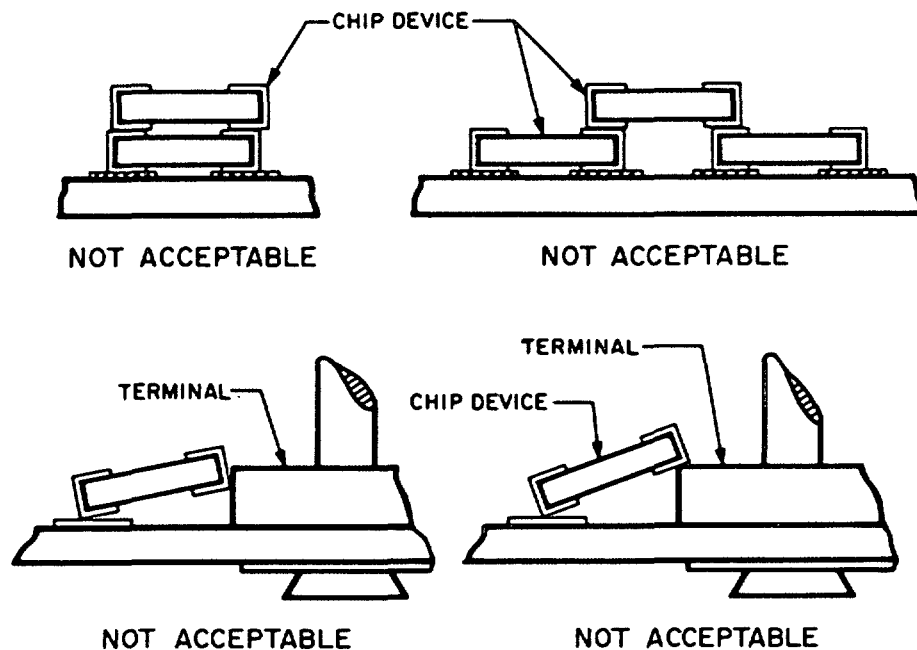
Improper mounting of chip devices (see 5.1.1.8.1).
